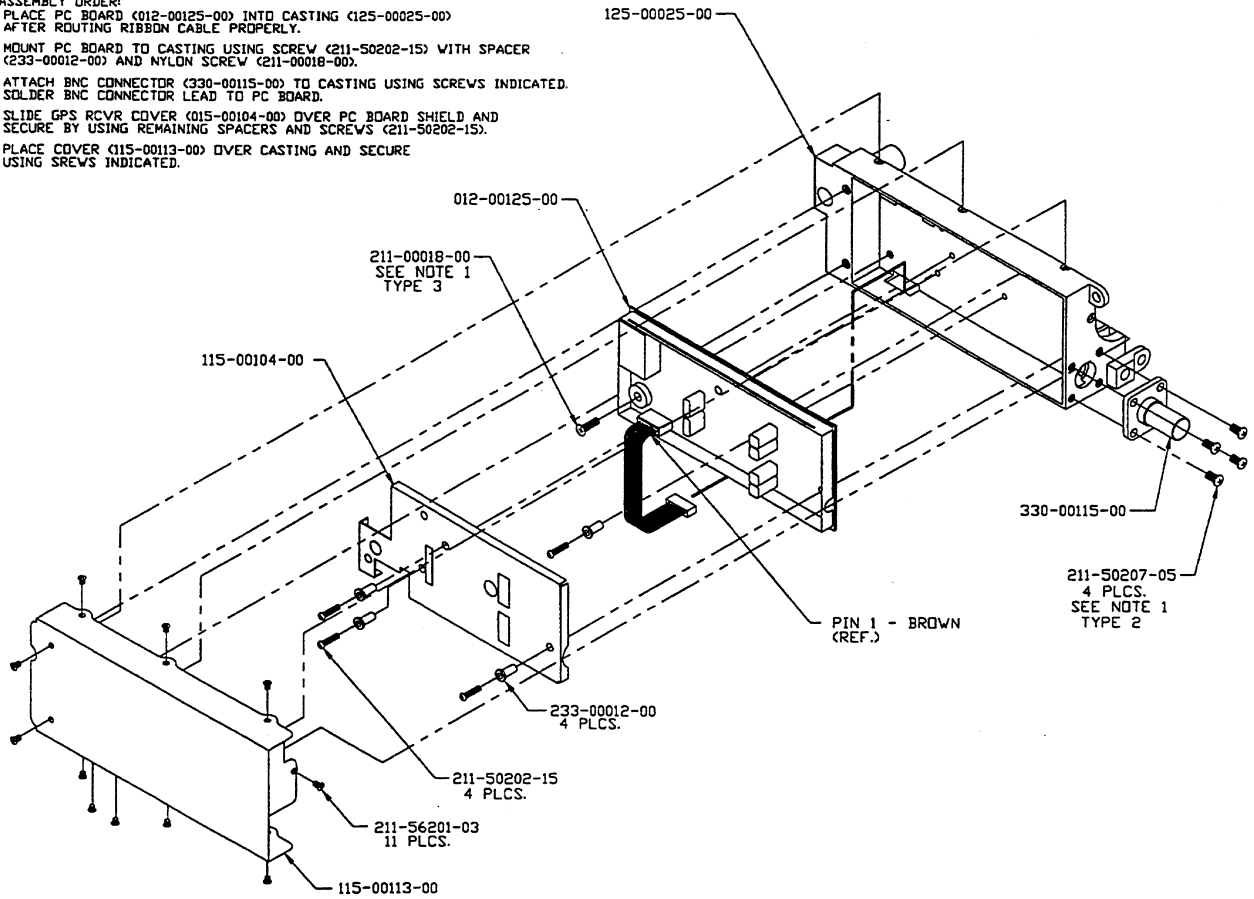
GNC 250/300 Assembly Drawing (View 4)
